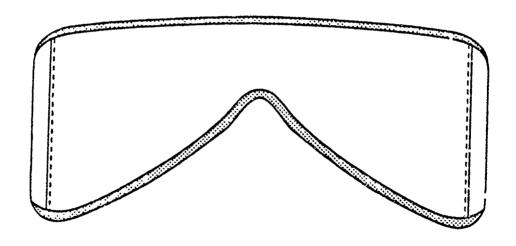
WINDSHIELD DESIGN, SINGLE LENS (REF O)
